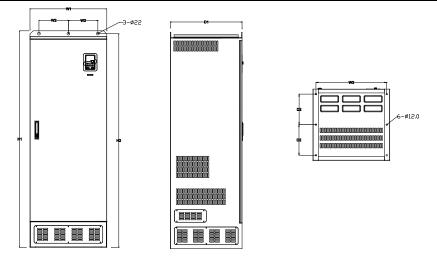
Floor installation of 660 V 400-630 kW VFDs
